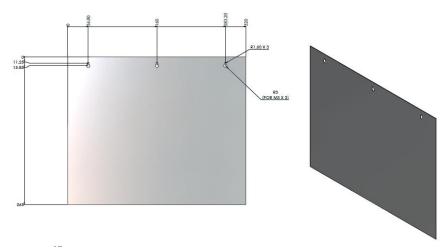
Reflector technical drawing with dimensions and position of fixing screws (x3)
